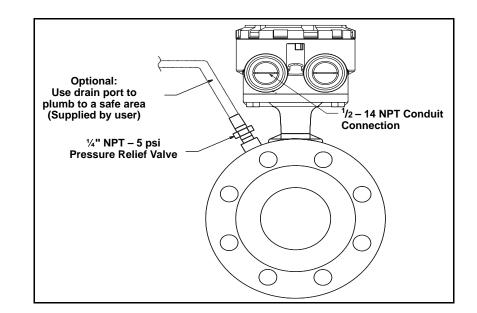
Coil-Housing Configuration — Standard Welded Housing With Relief Valve (Option Code W1)
